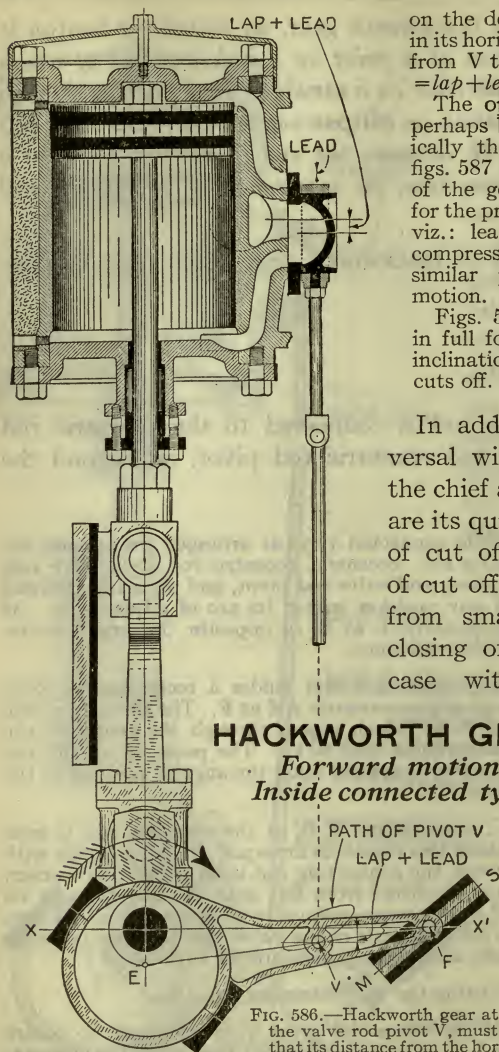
shows the inside connected type as arranged for outside admission. Its essential parts are: eccentric, eccentric rod, link, valve rod, eccentric rod pivot, link pivot, and valve rod pivot, and means for shifting and securing the link in any position within its arc of adjustment. As shown, the center of the eccentric is at E, or opposite the crank, corresponding to 90 degrees angular advance.
